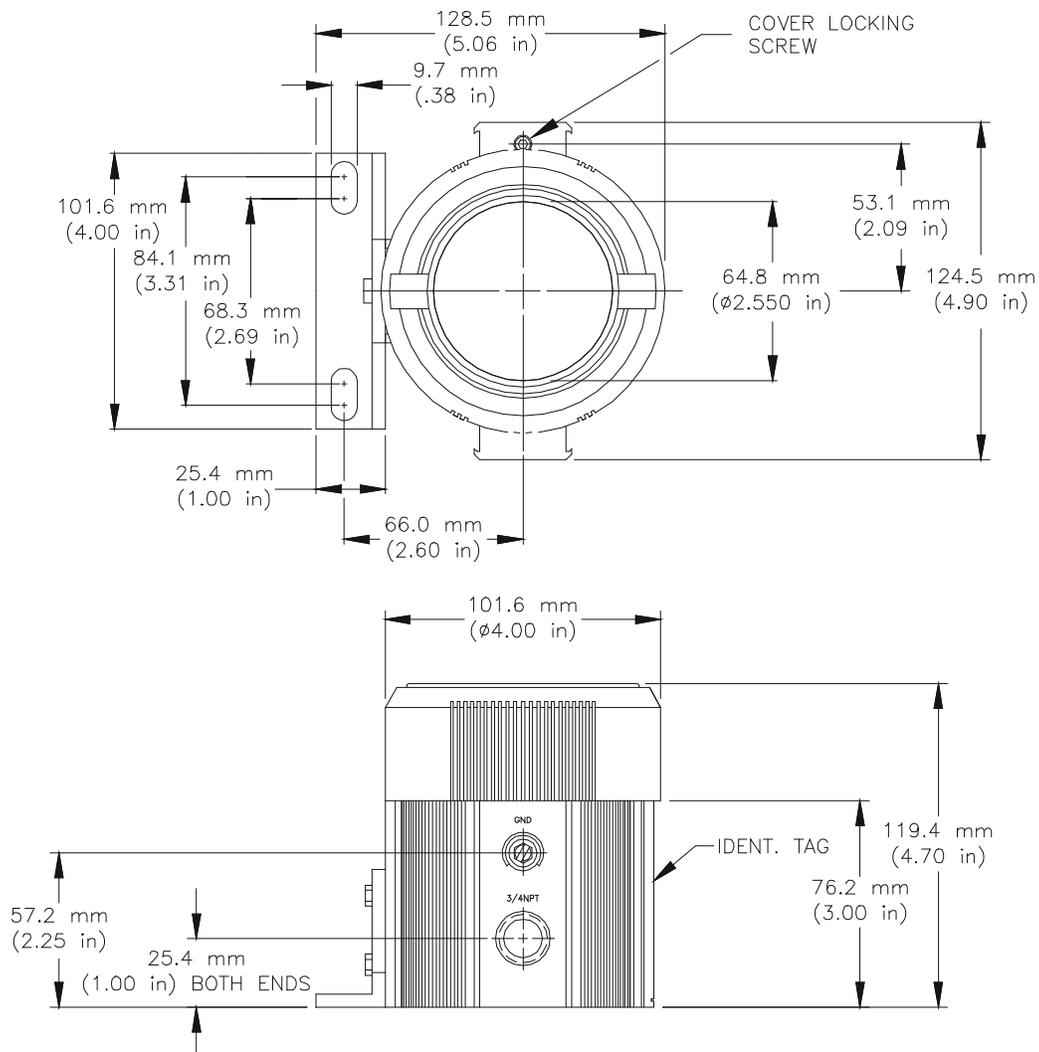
Enclosure with Display Dimensional Drawing (ATI-0569)
